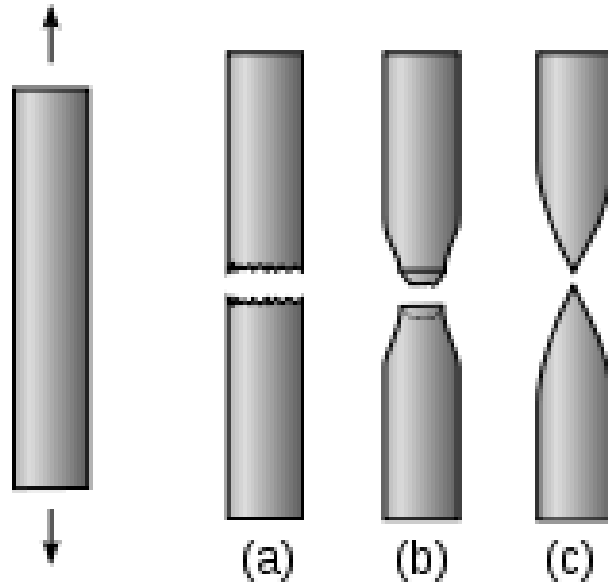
Fracture Types for Tensile Testing [19]
